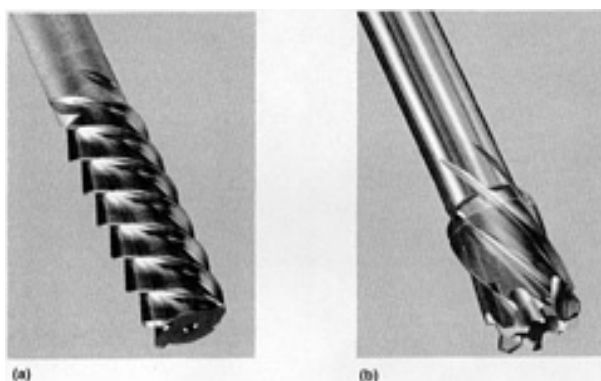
Broach and carbide mill reamers. (a) Broach reamer, made of high-speed steel with a left-handed helix of 60° or more, that can cut at 20 m/min (65 ft/min) at a feed of 0.25 mm/rev (0.1 in./rev). (b) Carbide mill reamer that can cut at 30 m/min at a feed of 0.3 mm/rev (0.1 in./rev)
